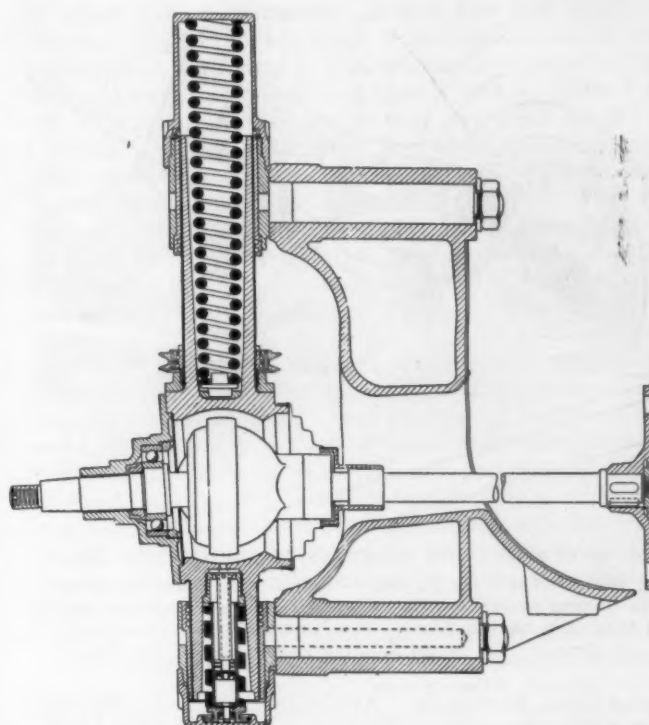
SECTIONAL VIEW OF THE KAMM FRONT DRIVE
